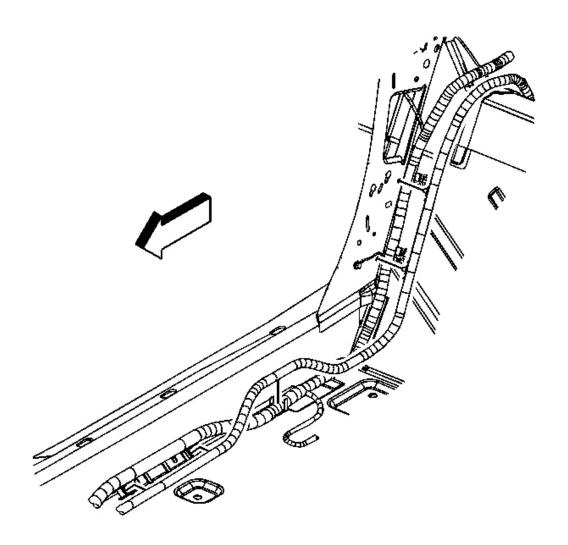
View Of Positive Battery Cable Retainers Courtesy of GENERAL MOTORS CORP.
